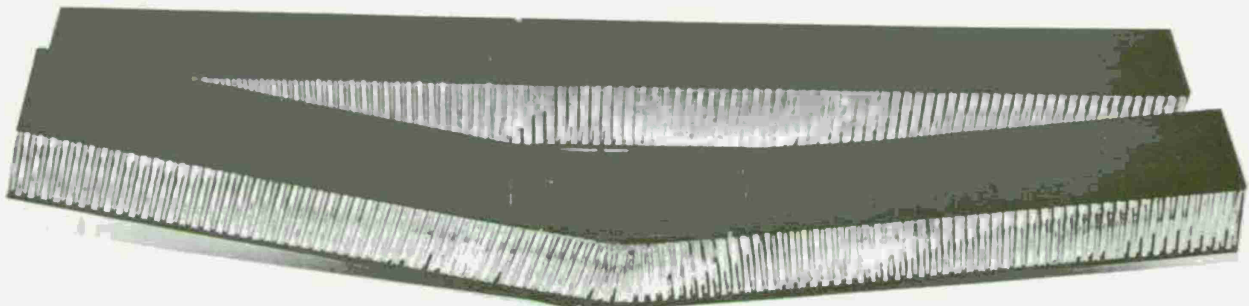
SANDWICH BEAM CONTAINING SURFACE SCRATCH
